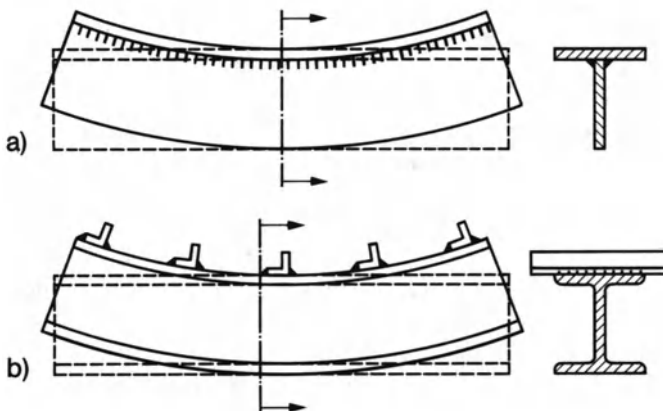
Bending deformation of girders with eccentric longitudinal weld (a) and eccentric transverse weld (b)
